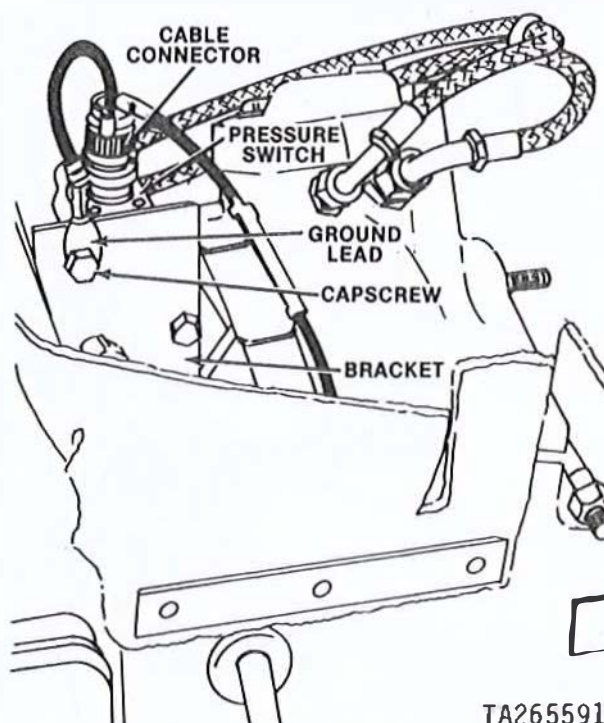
Removing or Installing Smoke and Dust Detector Cables
